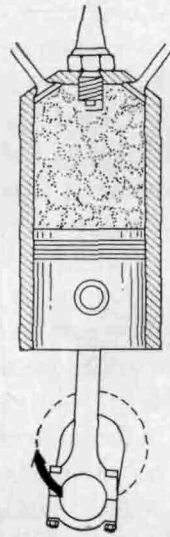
Compression stroke. The intake valve has closed, and the piston is moving upward, compressing the mixture.
